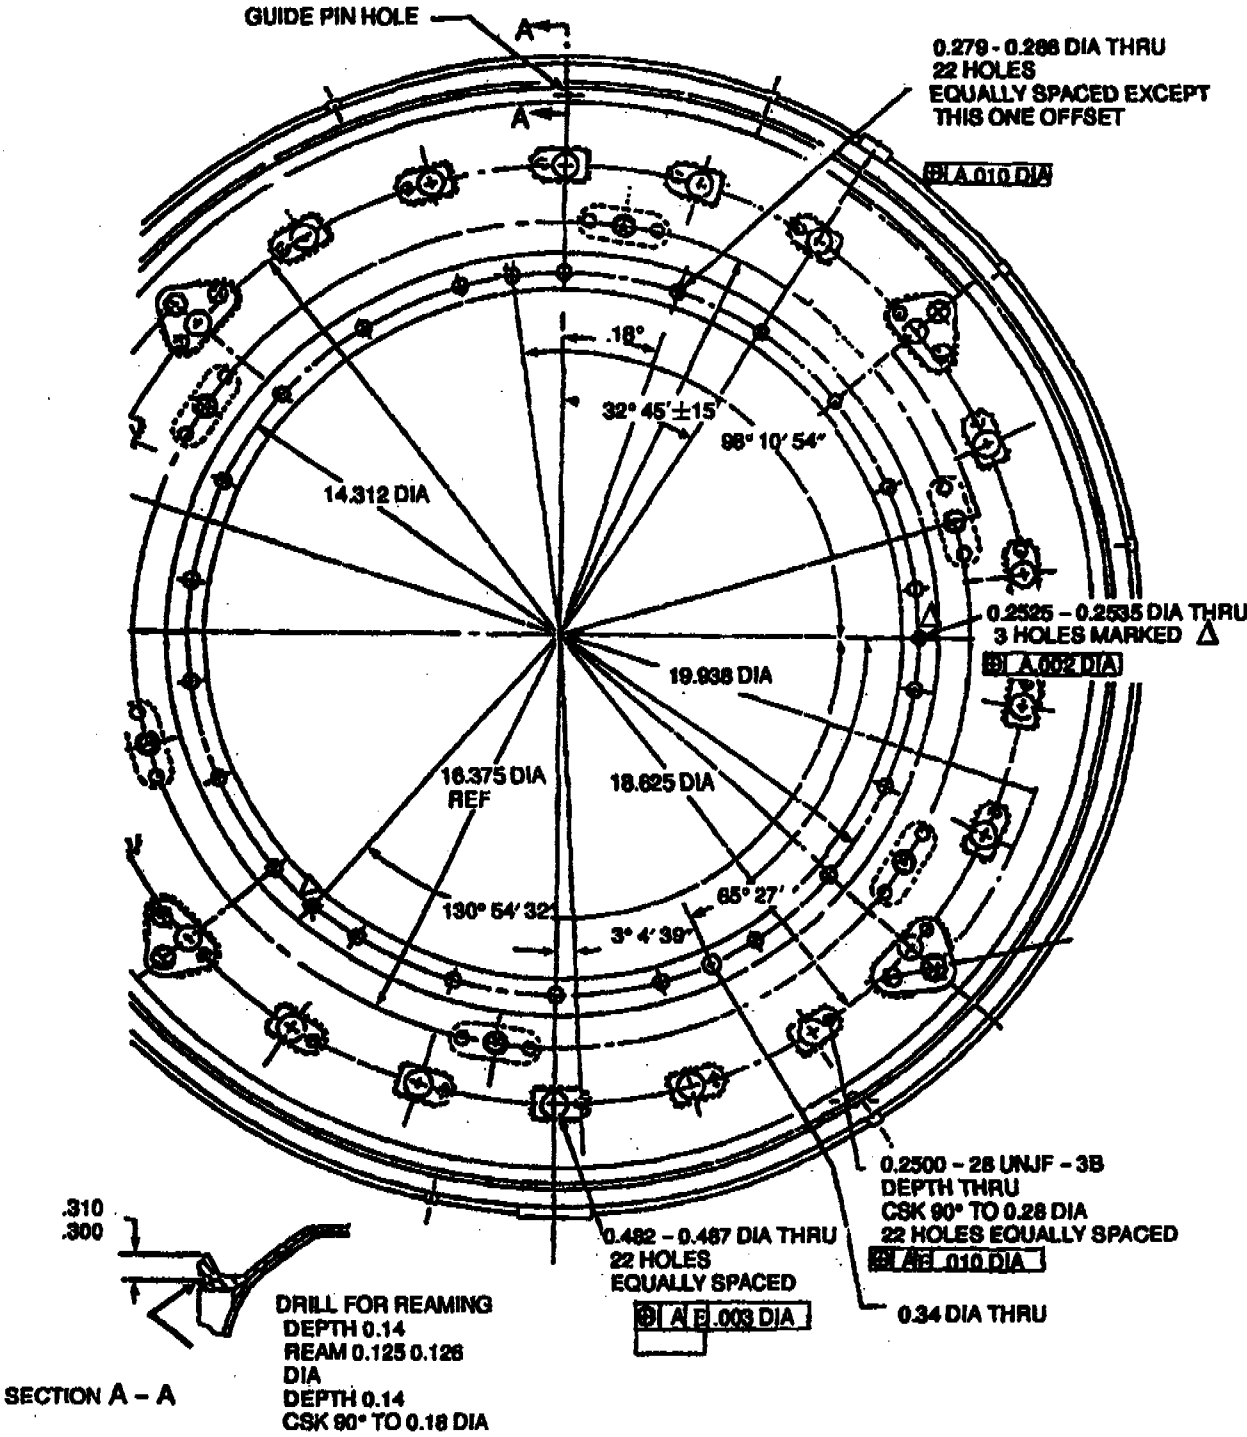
Combustion Chamber Housing Guide Pin Hole.
